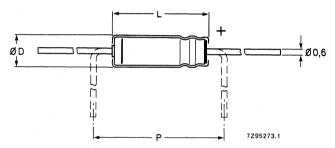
Style 1; see Table 1a for dimensions D. L and P.
